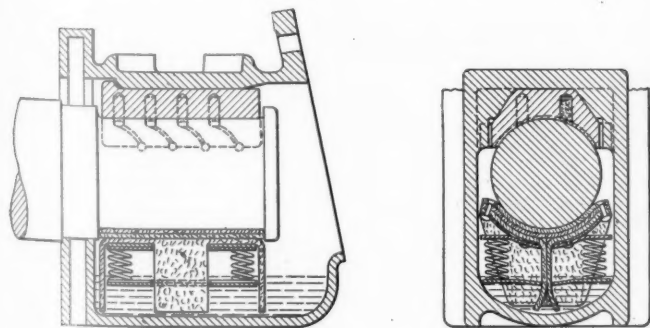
Sectional Drawing of the Journal and Lubricating Device
